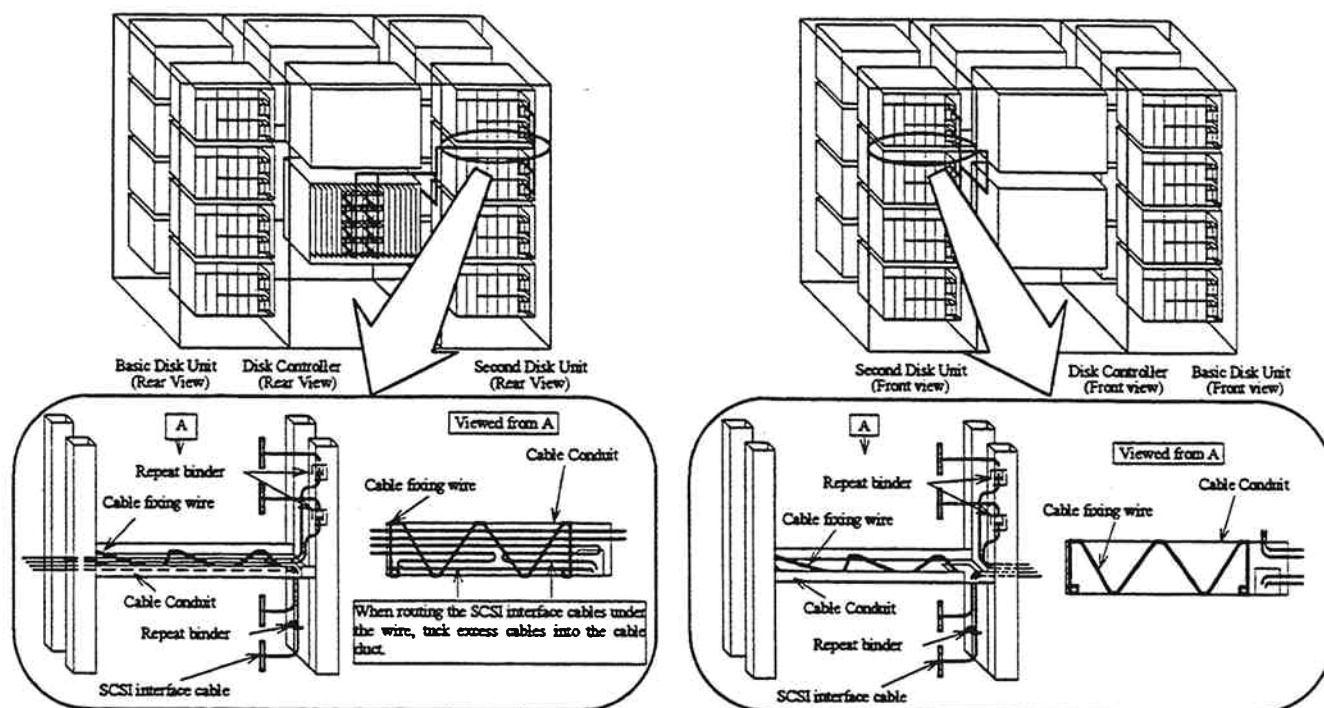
Fixing of the SCSI Interface Cables
